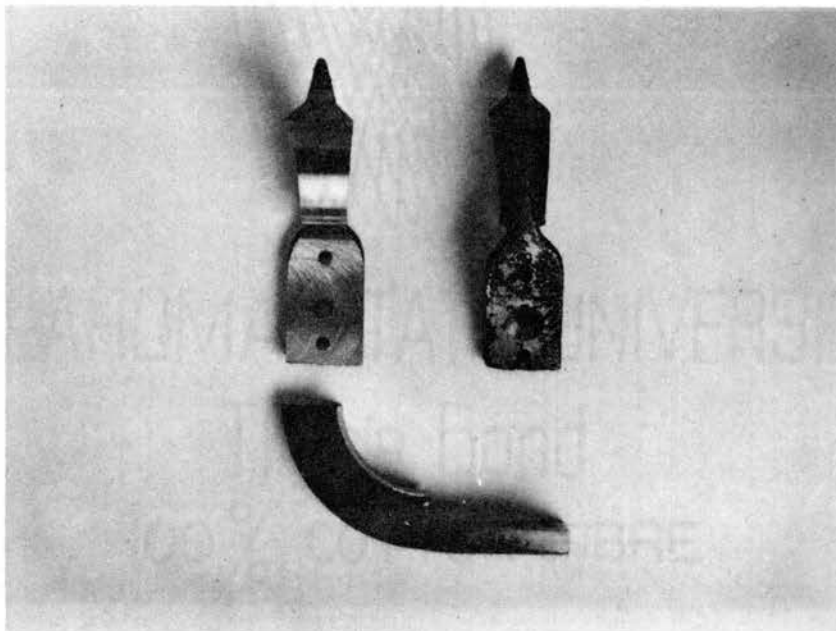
Top, Bottom, and Side Views of the Completed Guard-Ledger
